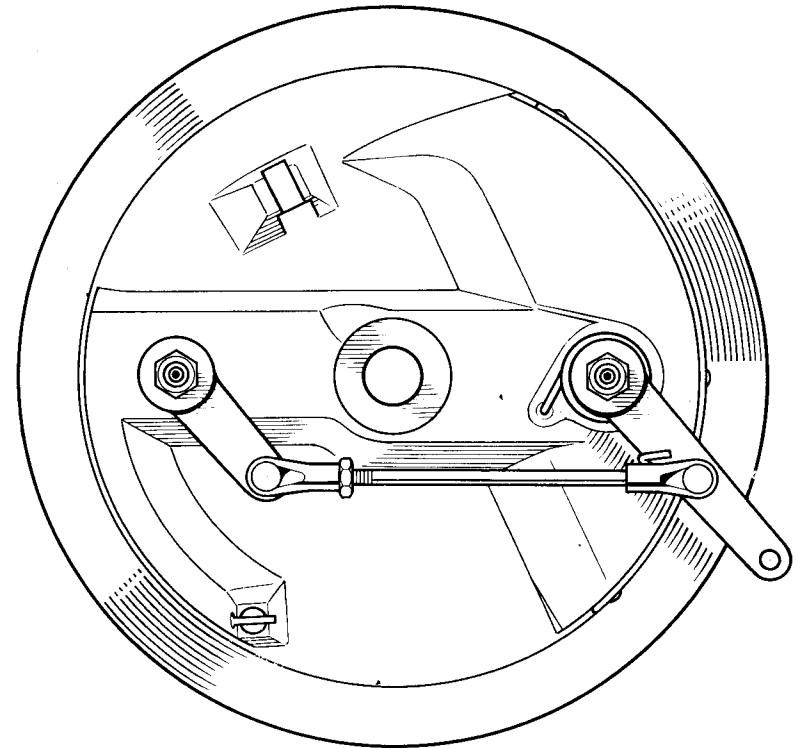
Two leading shoe brake showing cam lever adjusting rod.
